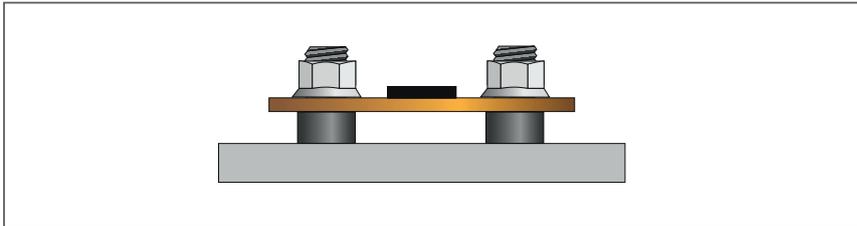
HV BM 1.2, remove the nuts from the threaded bolts on either side
